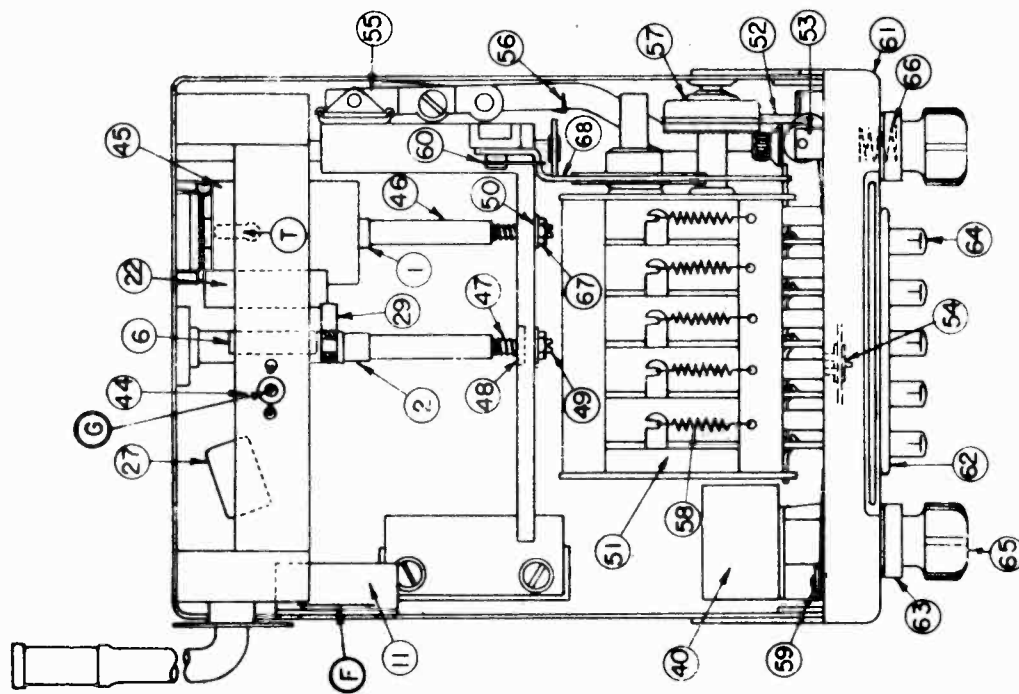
PARTS LAYOUT--TUNER ASSEMBLY
